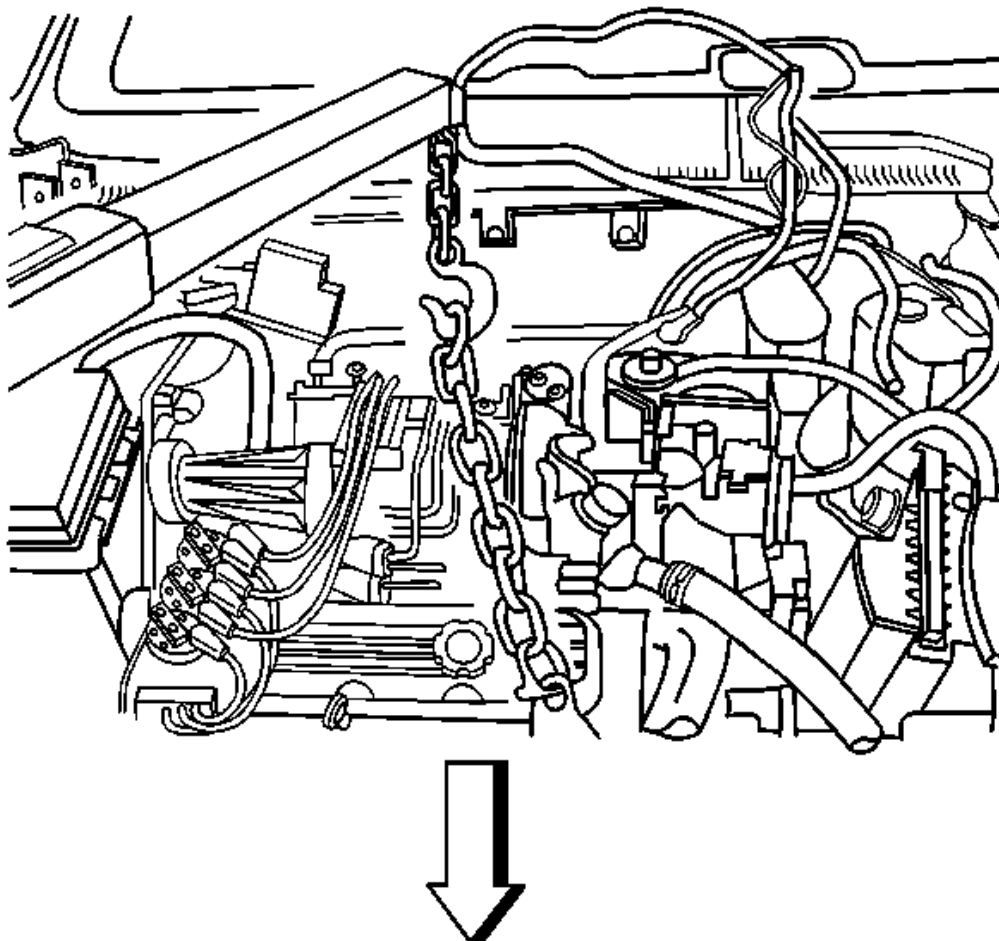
View of Engine Lift Chain, Lift Brackets, & Engine
